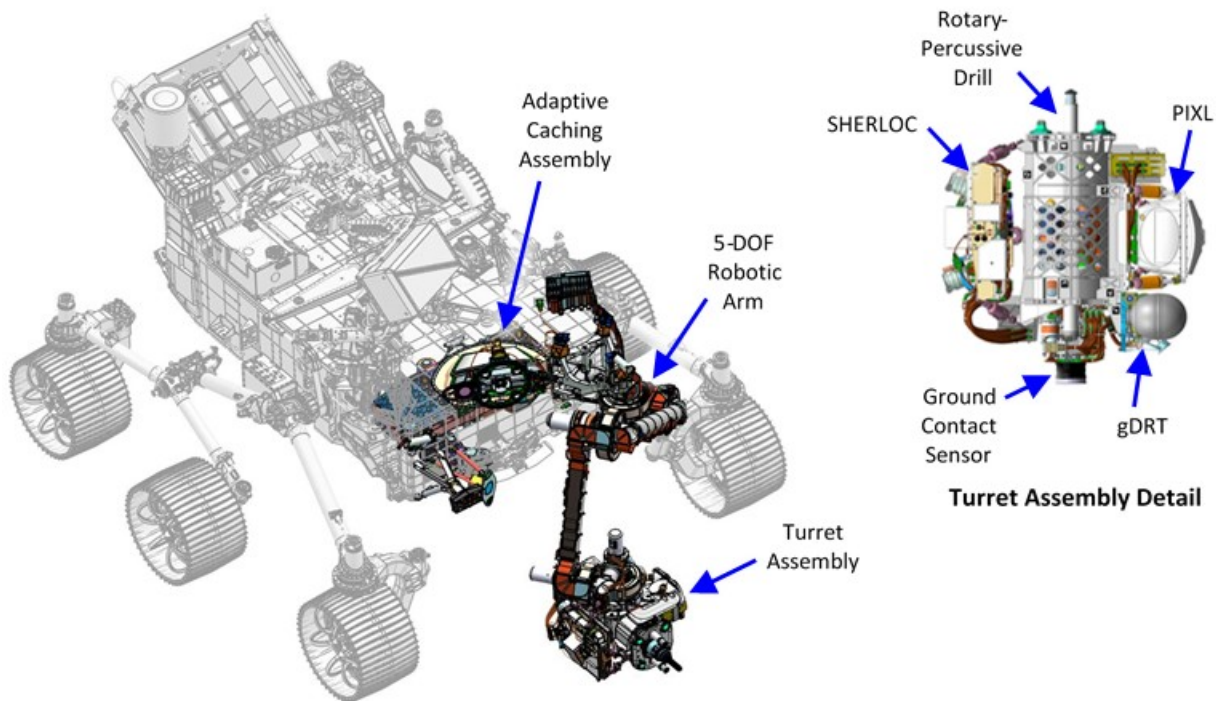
Perseverance Rover with SCS components highlighted, and Turret Assembly details.
